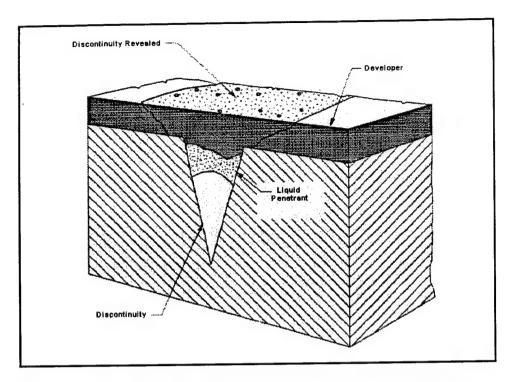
Flaw detection of a surface flaw with liquid penetrant (after ASM (1989))
